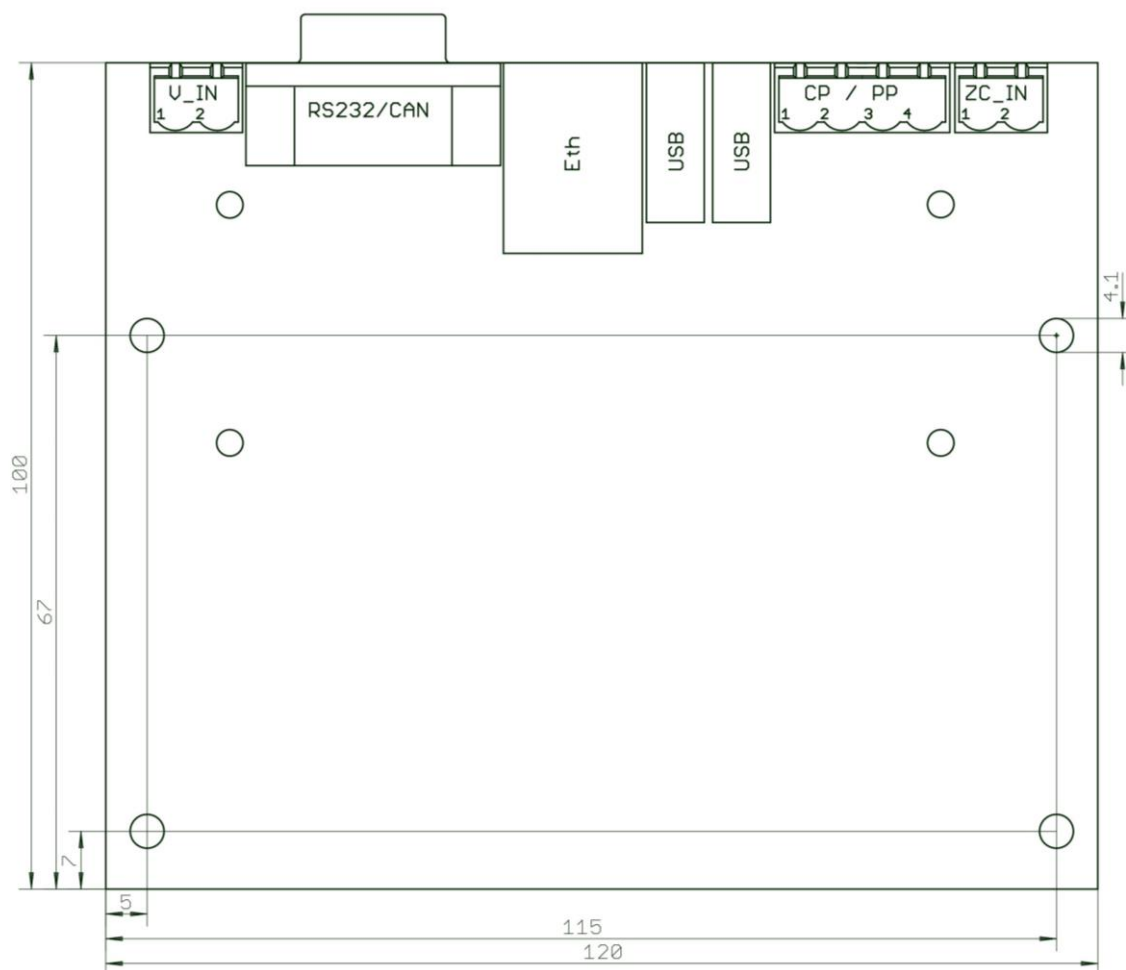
Mechanical drawing of EVCharge SE including connectors
